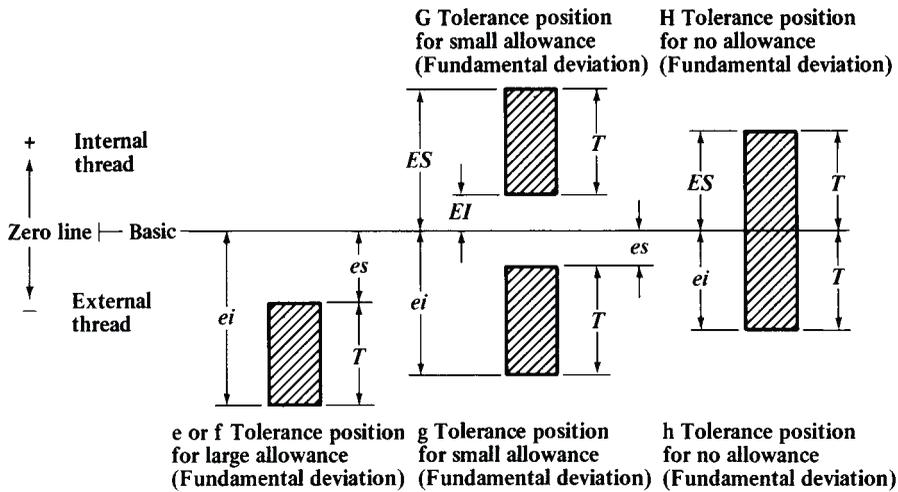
Metric Tolerance System for Screw Threads
